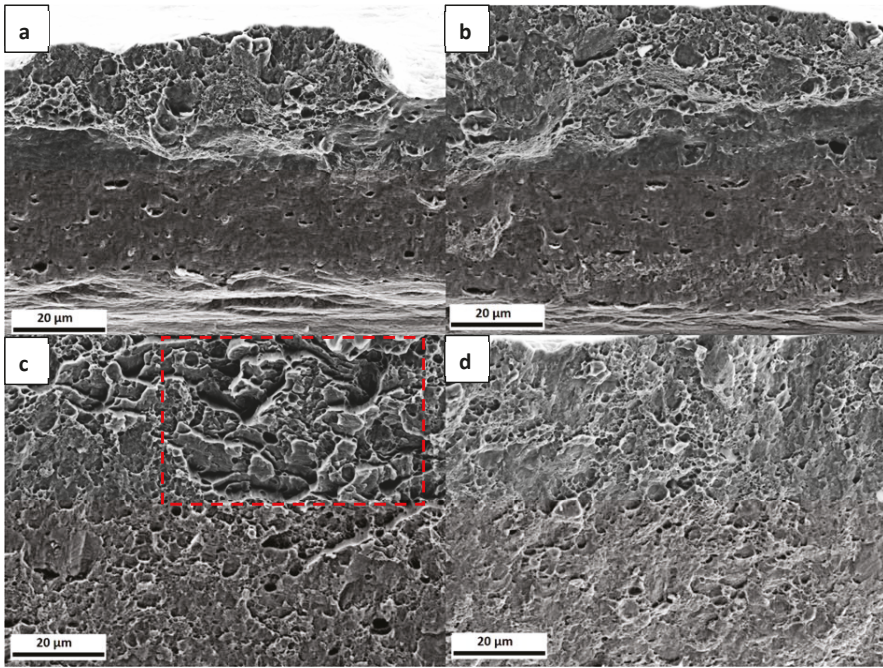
Fracture surfaces of the CP steel specimens tested with (a) 5 W; (b) 6 W; (c) 8 W; and, (d) 11 W. The red box in (c) indicates an area with shear fracture or specially oriented grains.
